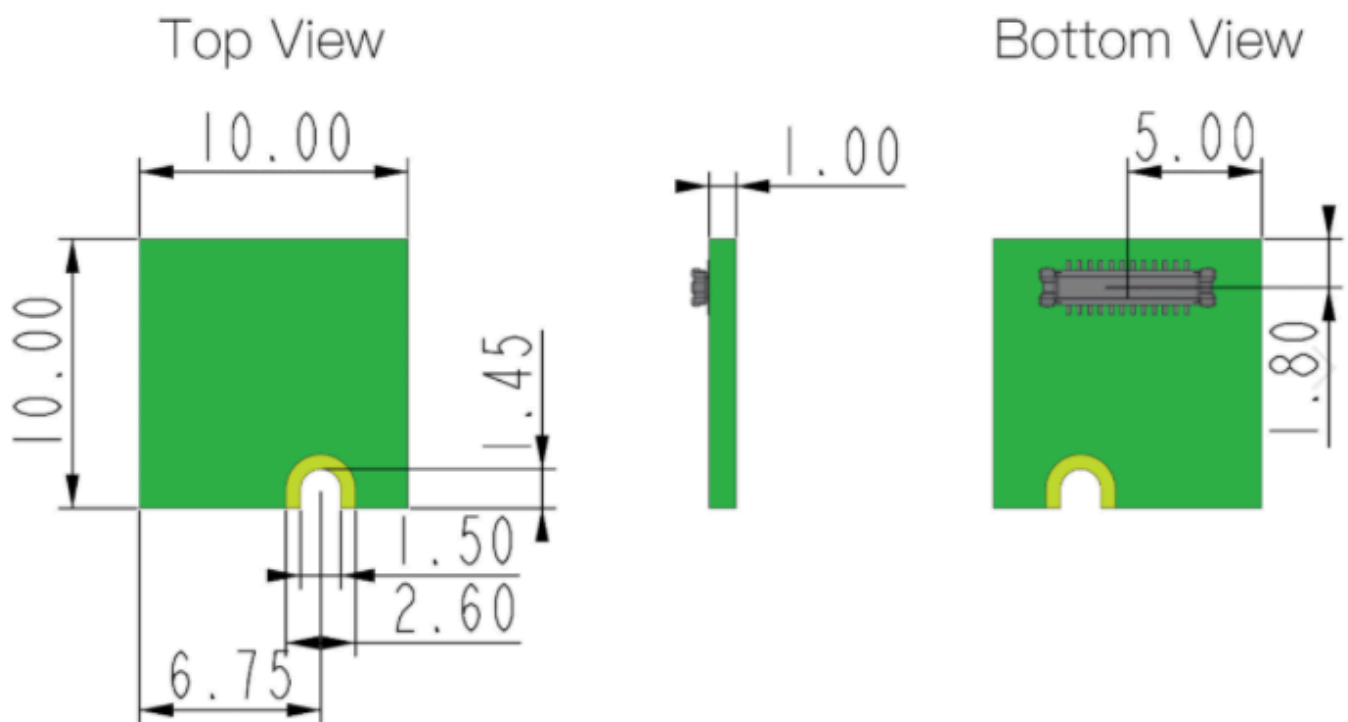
RAK5814 WisBlock Crypto Module Mechanical Drawing
